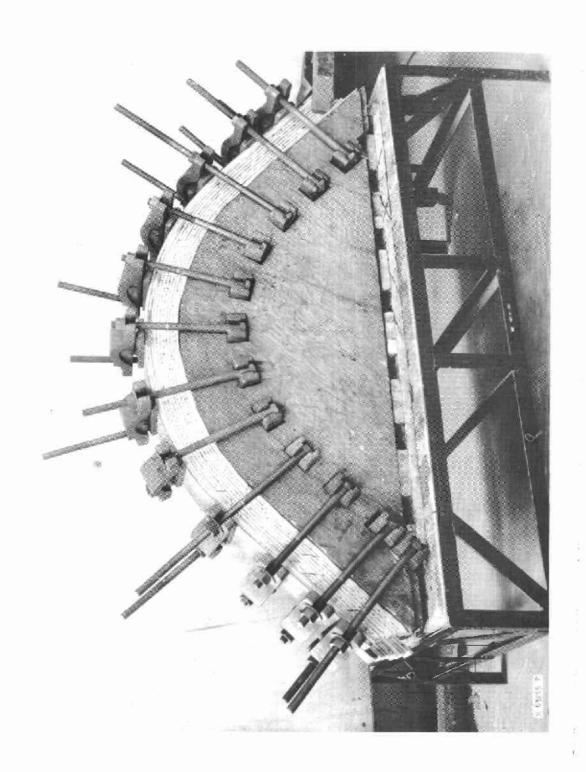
Complete assembly of equipment for bending laminated boat framing members. Two laminated frames are shown clamped in place over the wooden form of 22.9-inch radius. Plywood sides were glued to the wooden form for holding the clamps in place. Z M 67741 F
